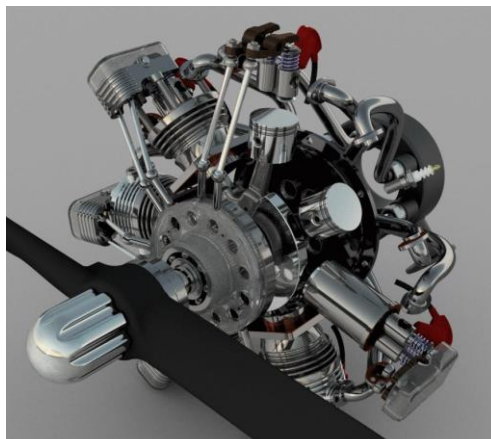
Engine Operation of 7-Cylinder Radial Engine
